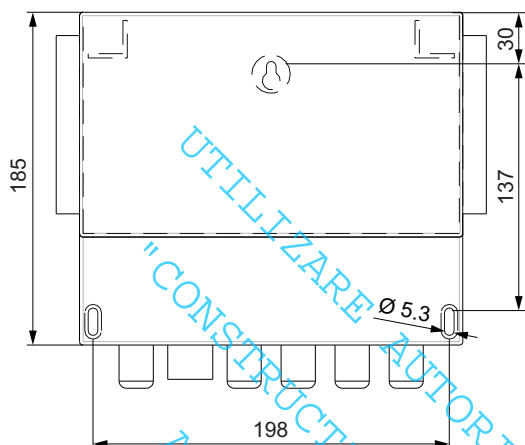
Dimensions of CU 382 control unit for wall-mounting, back (in mm)
